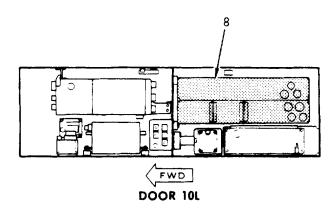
Engine Fuel Supply System Component Locator (Sheet 2)
